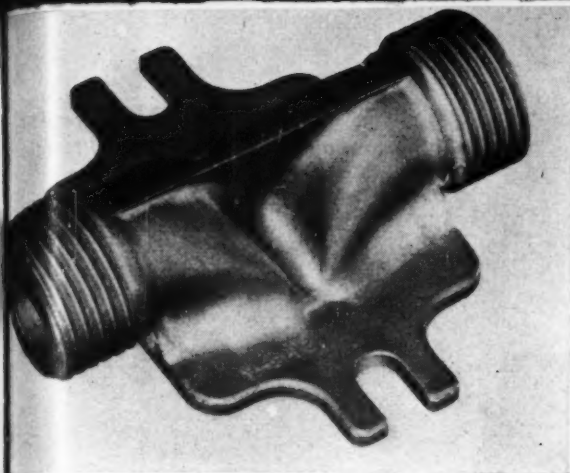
Left—Cast fitting with Acme threaded end connections used as cast
